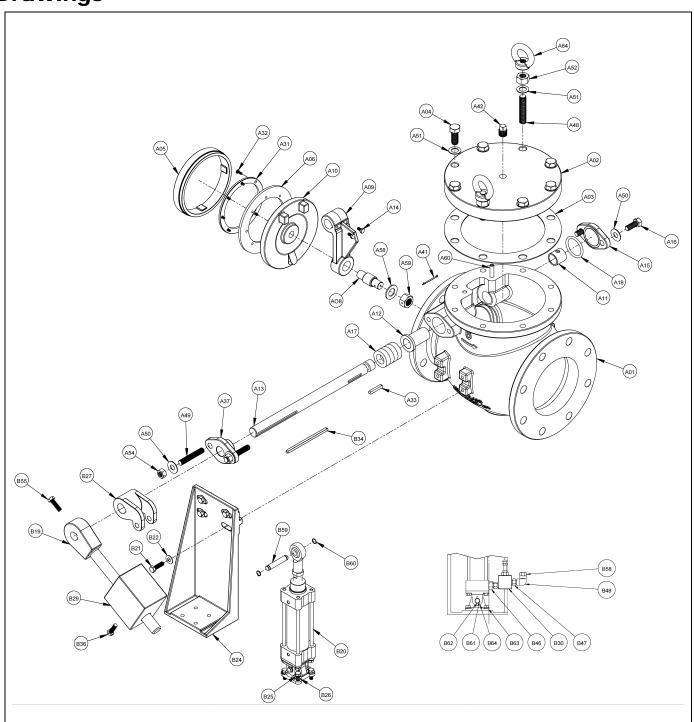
585 Series Swing Check Valve (with Air Cylinder)
